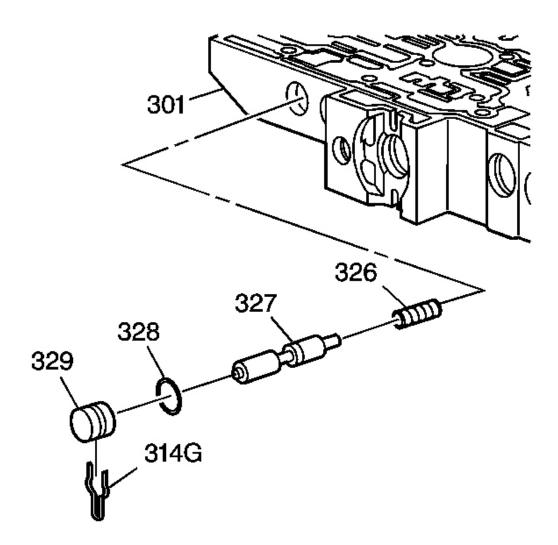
Identifying TCC Regulator Apply Valve Courtesy of GENERAL MOTORS CORP.
